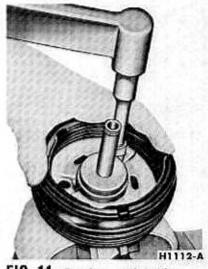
Retainer and Guide Sleeve to Valve Housing Installation
